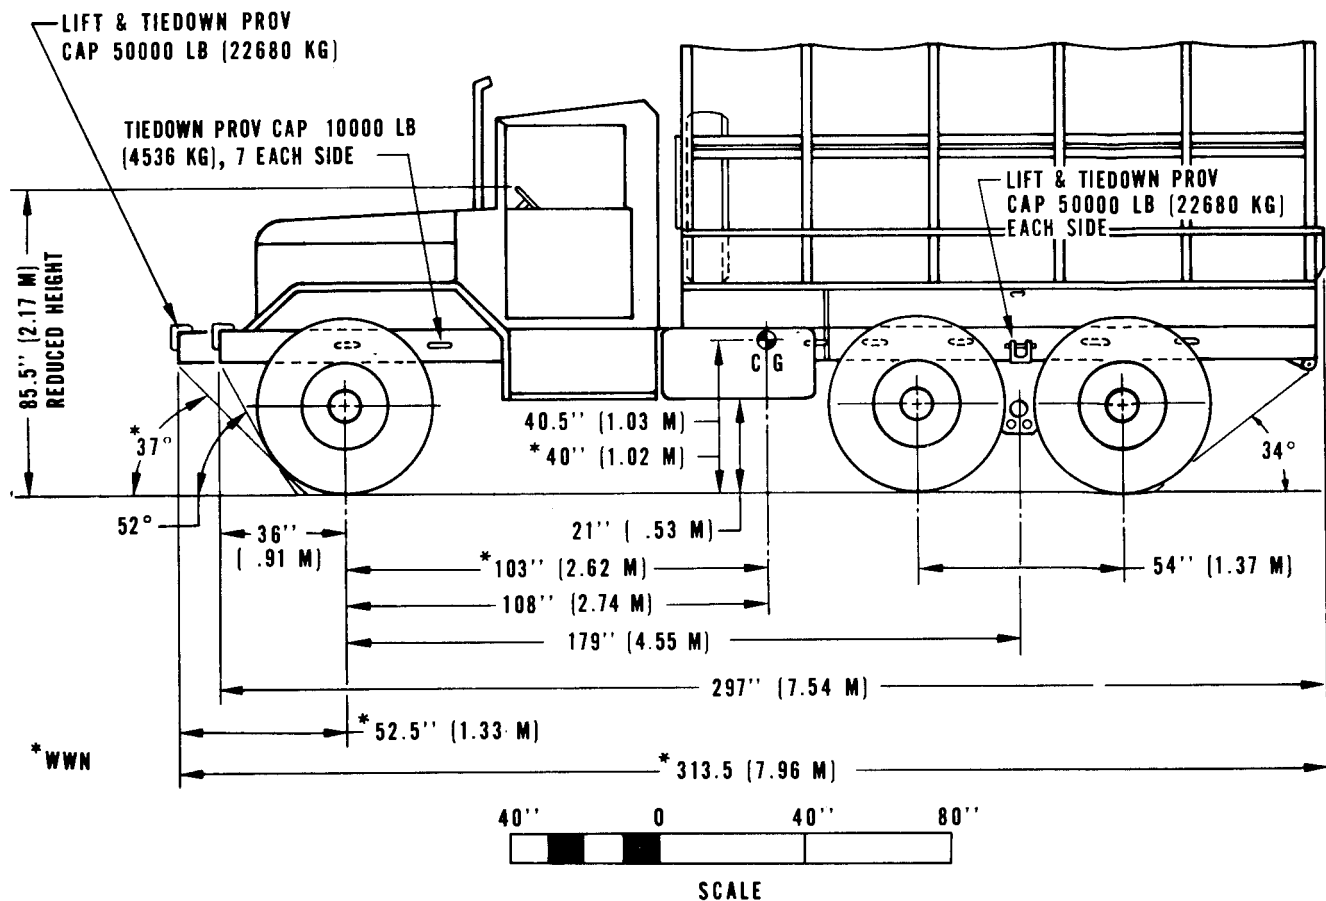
Side elevation, truck, cargo, WWN and WOWN, M54.
